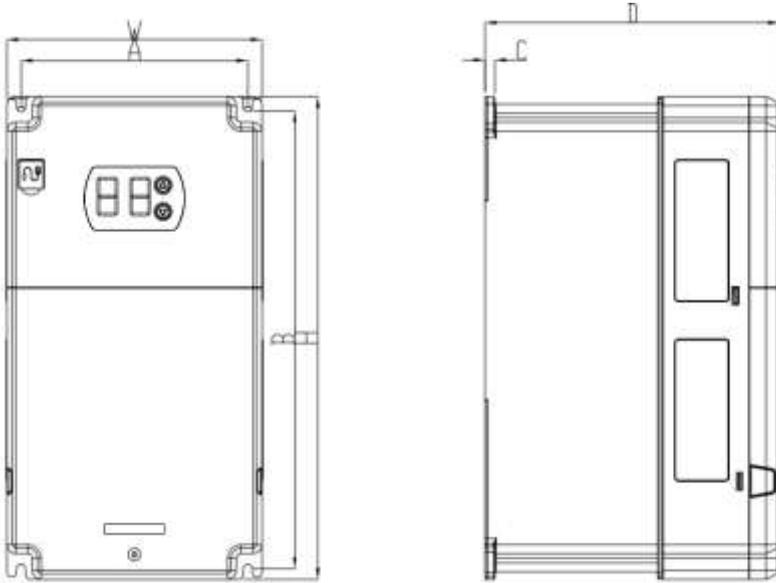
Installation dimension of EC100 elevator intelligent integrated machine
